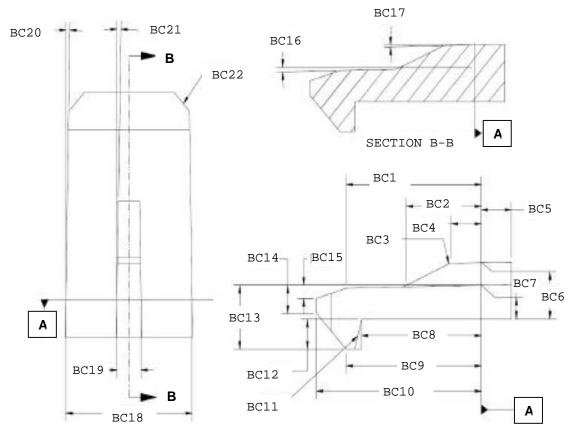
SNAP 1 CANTILEVER CONNECTOR
